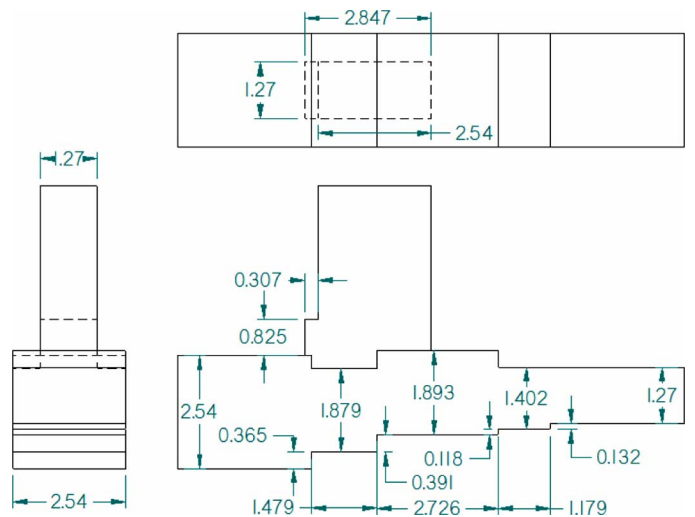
Final dimensions in millimeters of the W-band OMT design. Front, lateral, and top views of Fig. 1(b).
